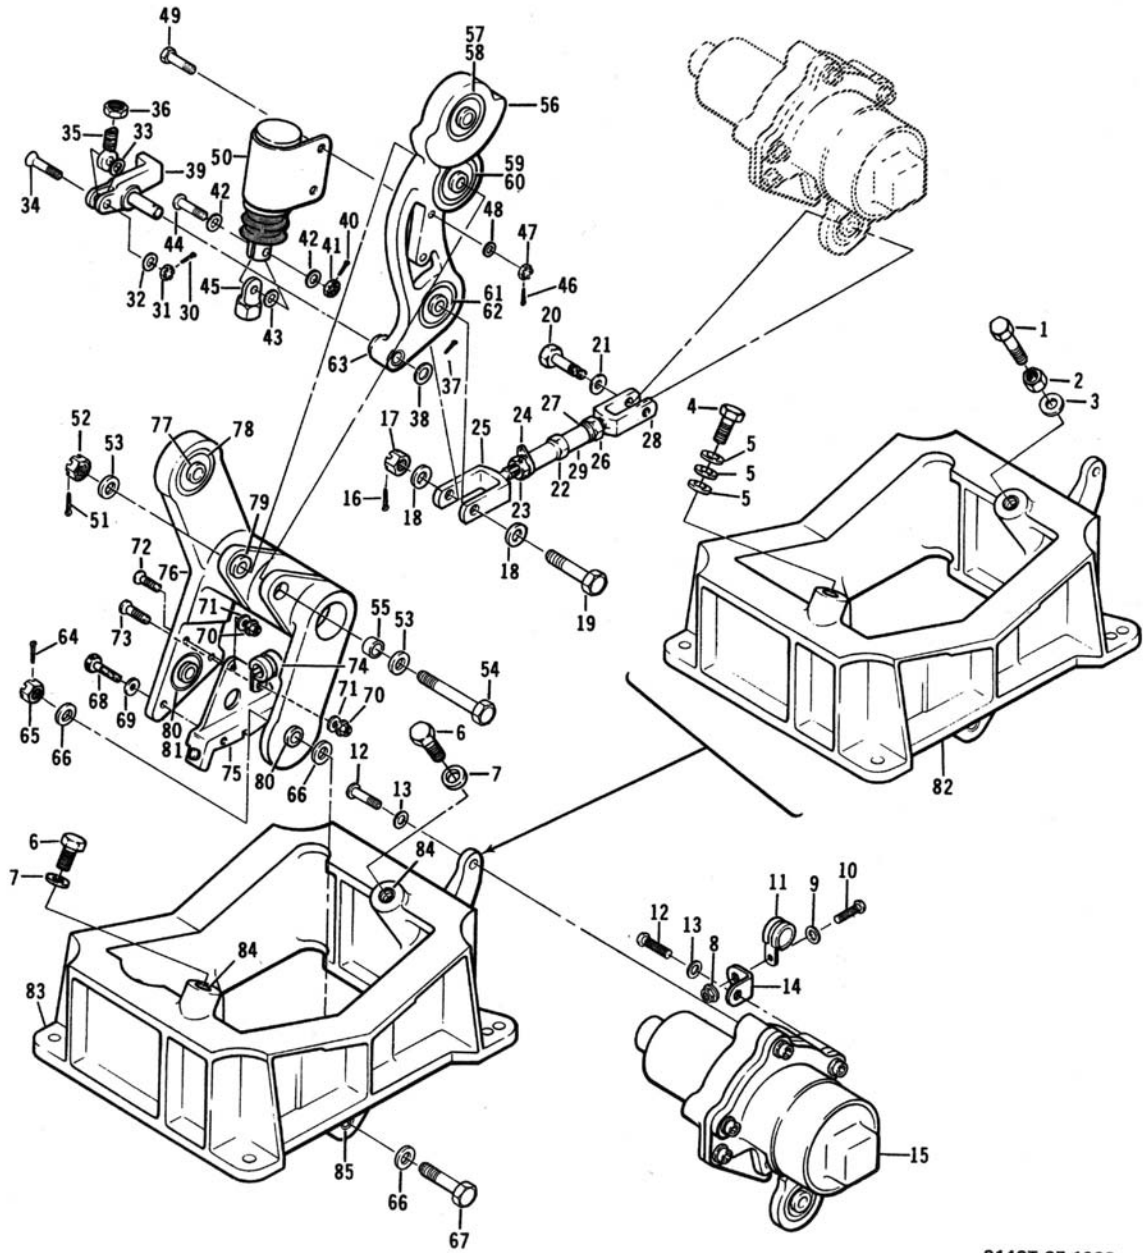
SOLENOID AND STOP-LOCK LATCH ASSEMBLY
